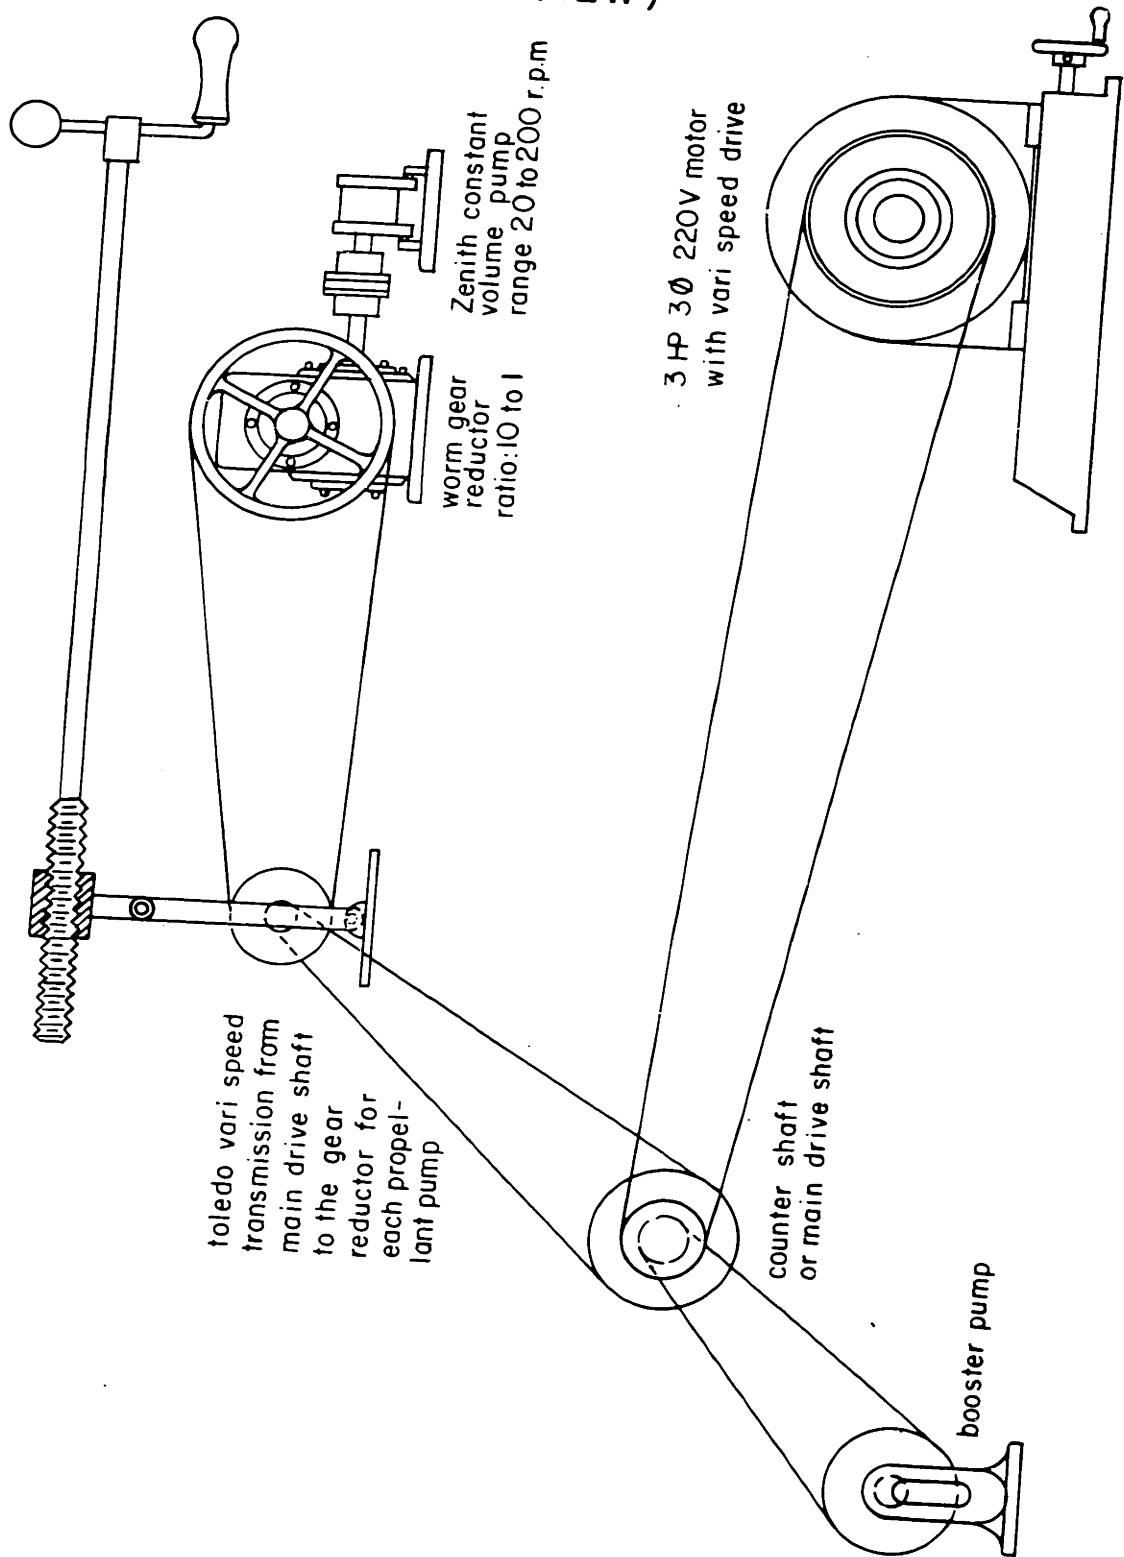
PUMPING STAND EQUIPMENT SHOWING VARI-SPEED DRIVES (SIDE VIEW)
